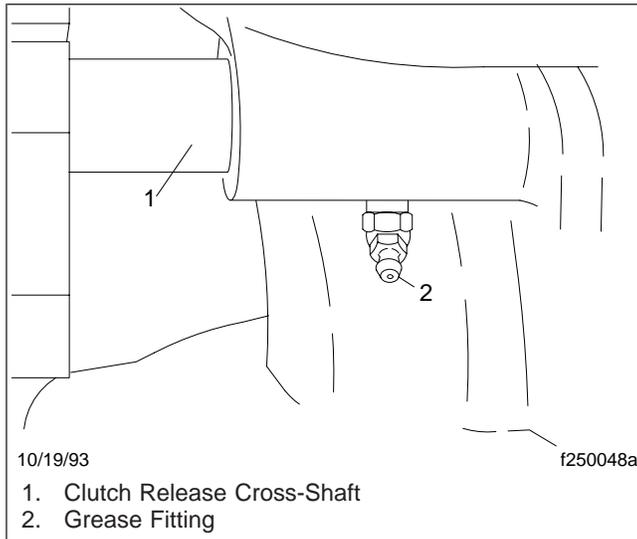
, Cross-Shaft Grease Fitting, Left Side
